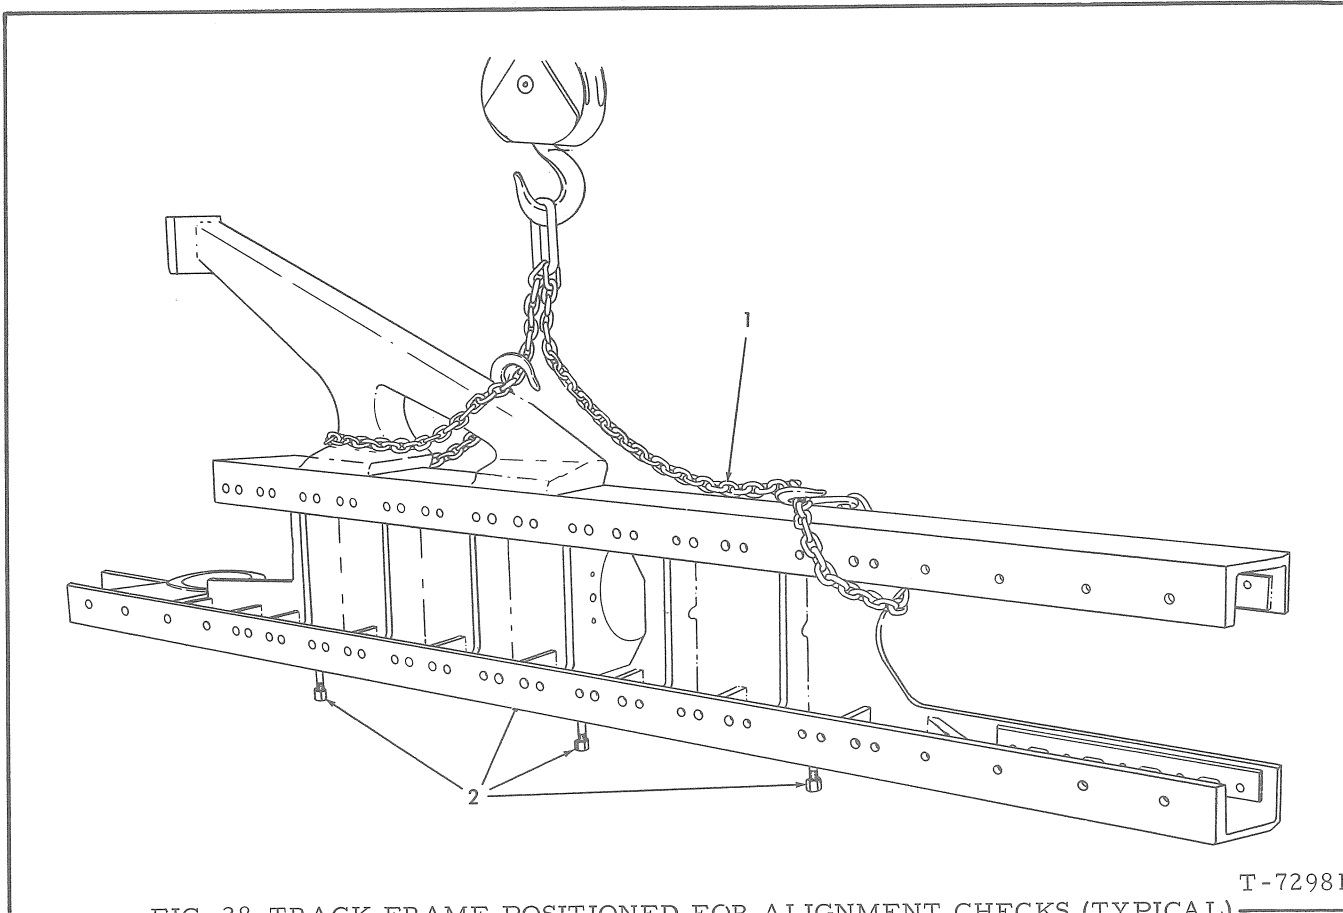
TRACK FRAME POSITIONED FOR ALIGNMENT CHECKS (TYPICAL)
